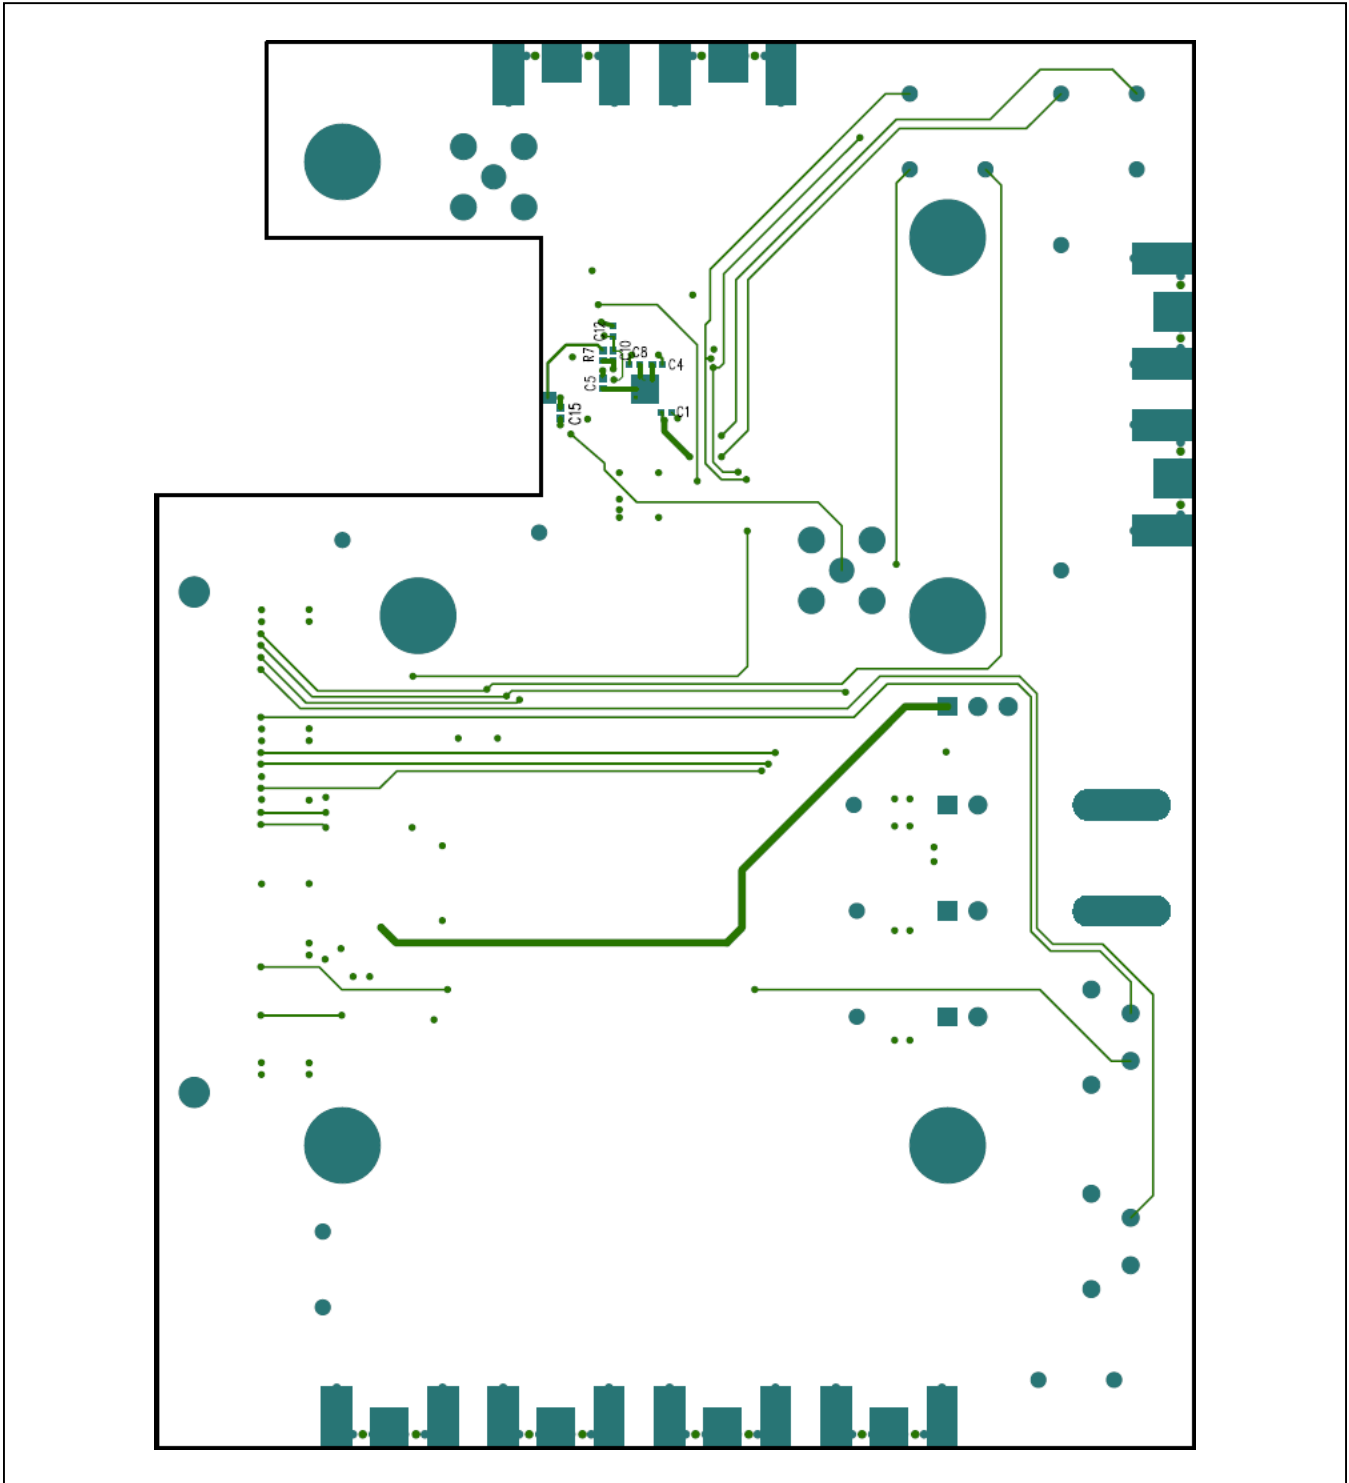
MAX3710 EV Kit PC Component Placement Guide—Solder Side
